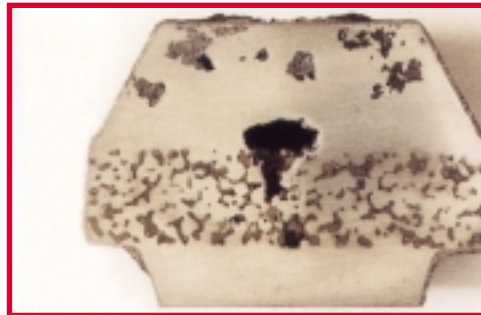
A section through a used STELEX filter showing large quantities of inclusion debris trapped by the filter
